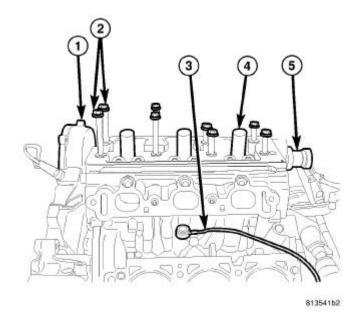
Right Cylinder Head Courtesy of CHRYSLER LLC
